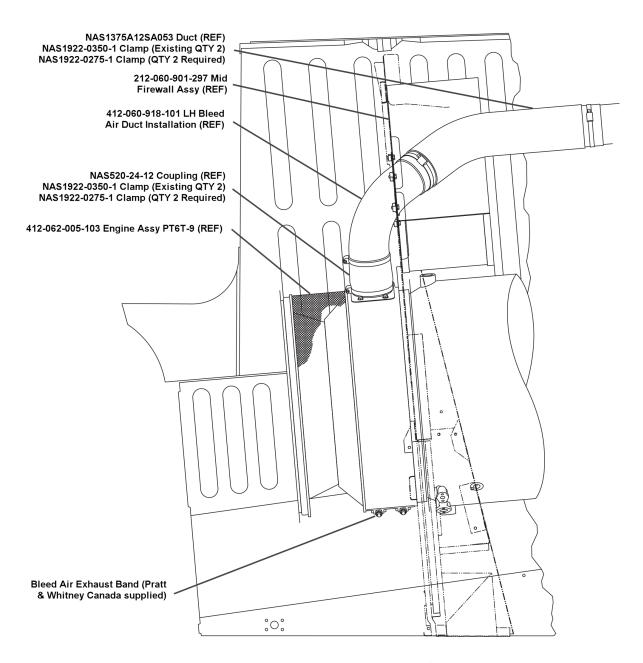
shows the LH duct installation 412-060-918-101, RH duct installation 412-060-918-102 is similar.
